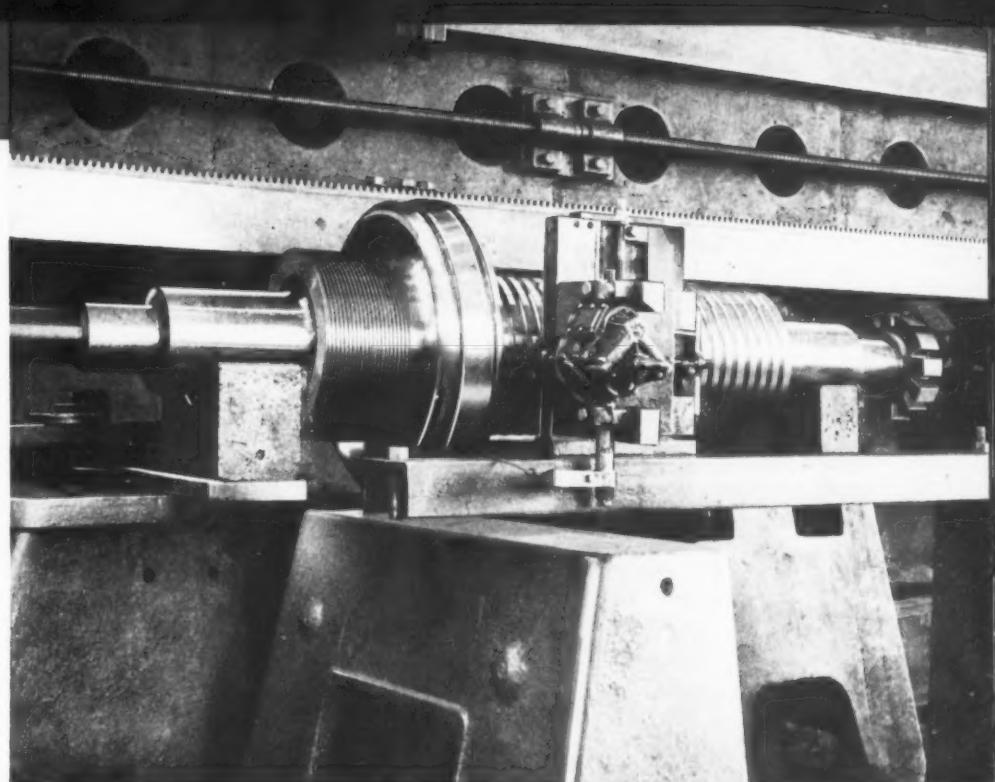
Lathe Operation in which Finishing Cuts were Taken on a Turbine Rotor, Including the Cutting of the Various Blade Grooves
